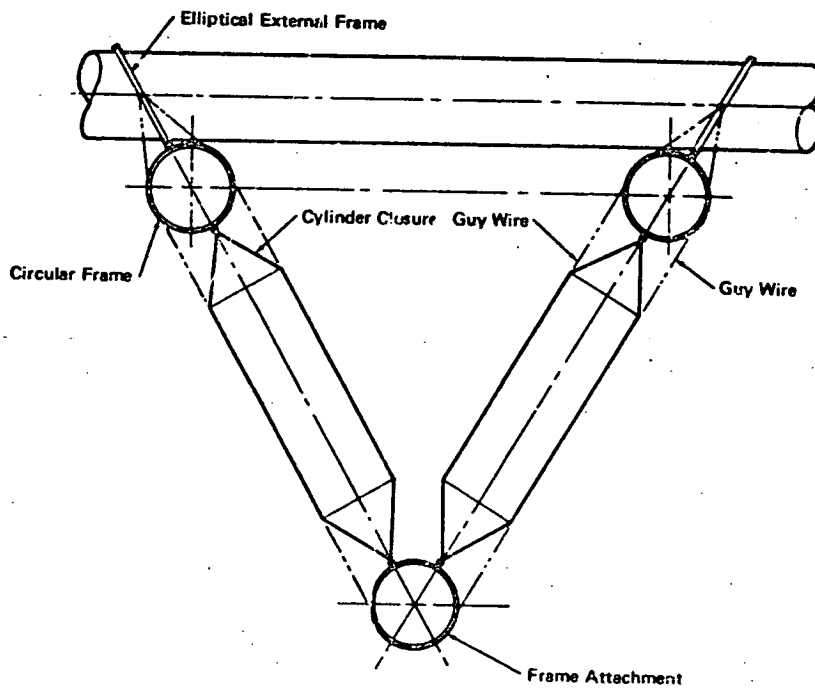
Cross Beam Arrangement at Payload Attach Stations.
